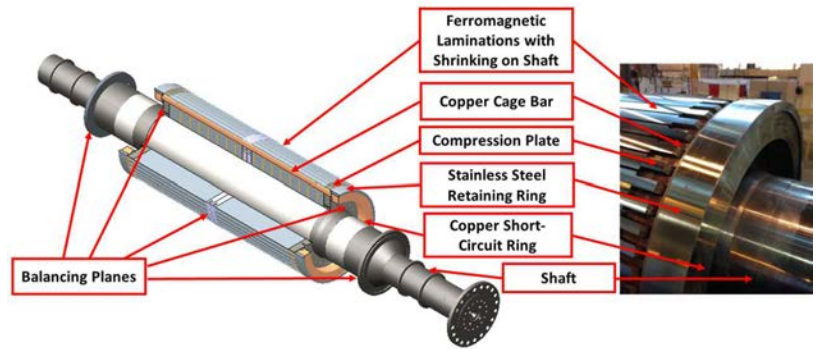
Laminated Ferromagnetic Part Hooped on Shaft Arrangement
